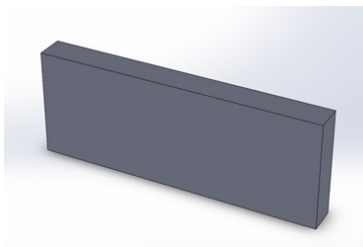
A CAD model of the 'rectangle' which is part of the HLD controlling device
